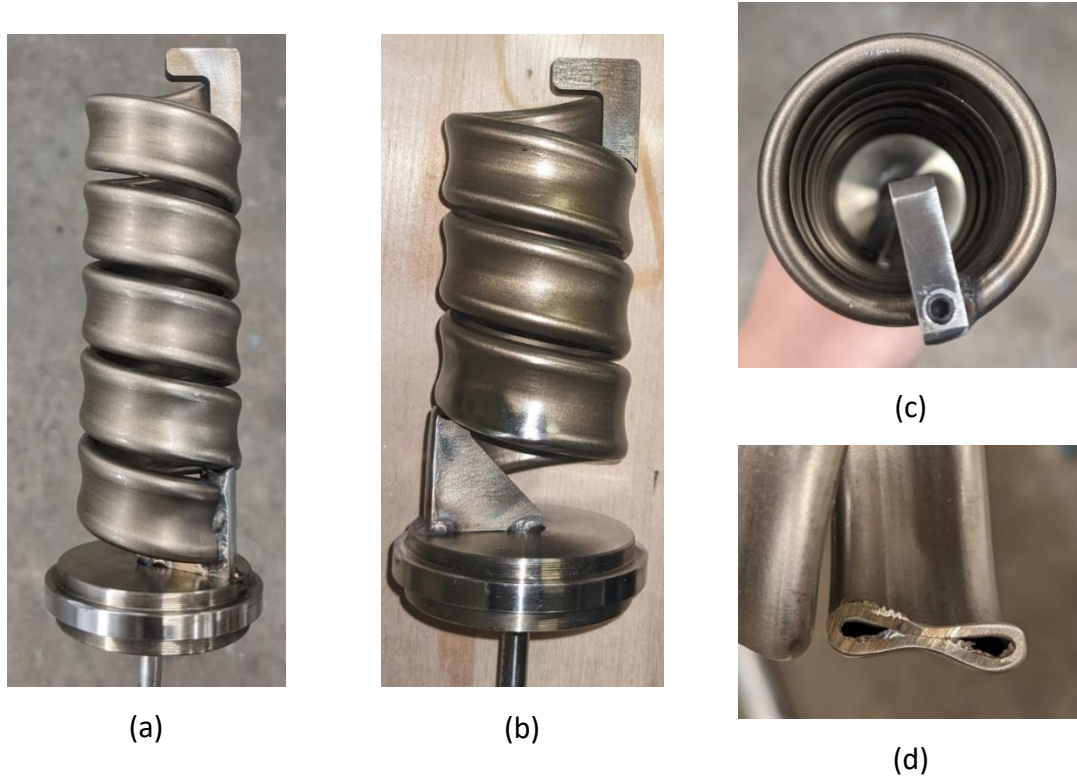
Two types of Bourdon tubes with four coils (a) and three coils (b). (c) Top view. A set screw was used to seal off the tube. (d) Cross section view.
